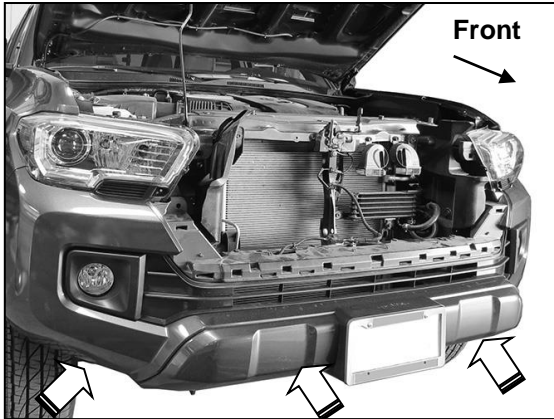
Remove plastic cover from top of radiator. Note cover will not be reinstalled to allow access to the winch clutch release lever
